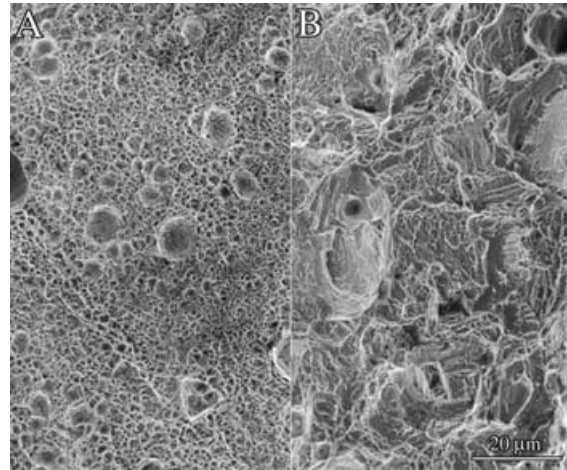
SEM micrographs of the fracture surfaces of gold alloy specimens. (A) laser welded without argon shielding; (B) control.
